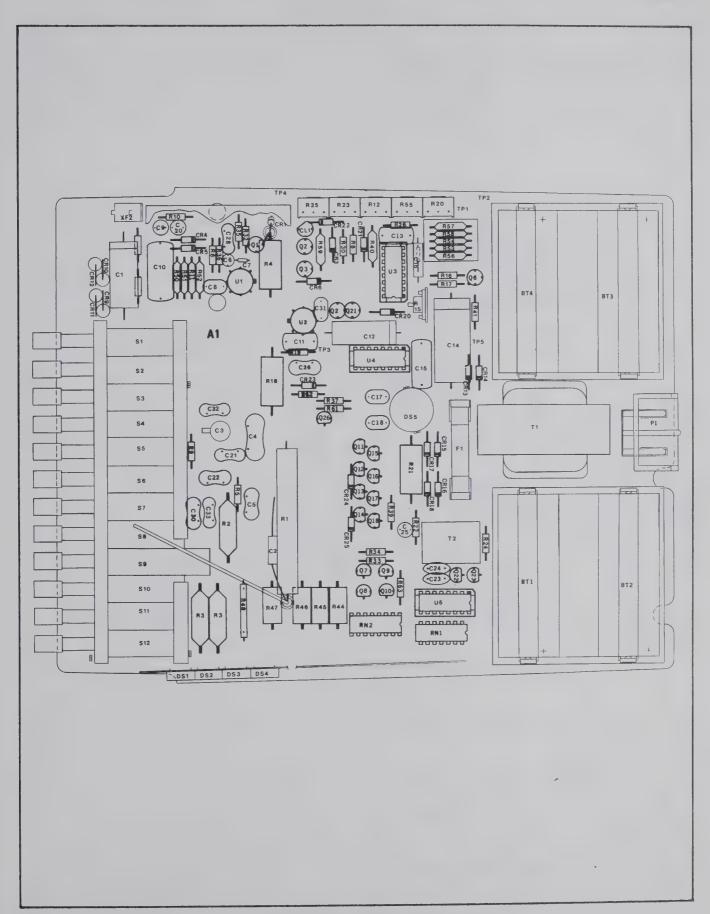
8000A-01 MAIN PCB ASSEMBLY
